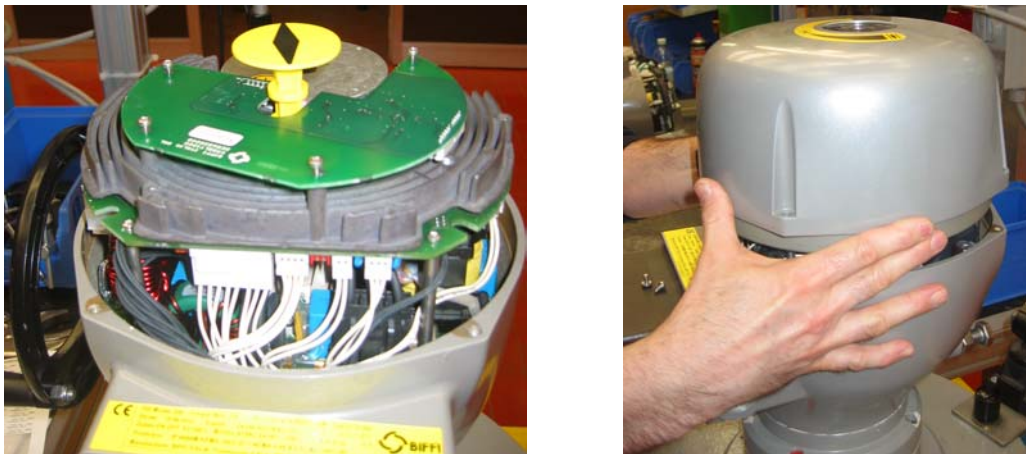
Fixing Spacers and Electronic Card on F02 models 063/125
